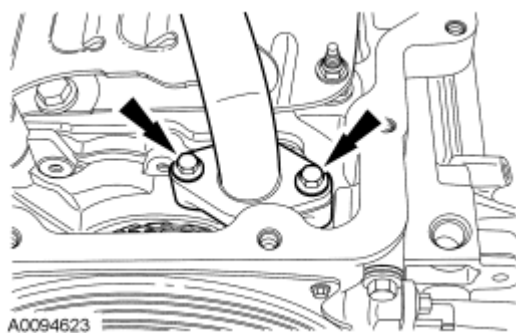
Locating Oil Pump Screen & Pickup Tube Bolts
